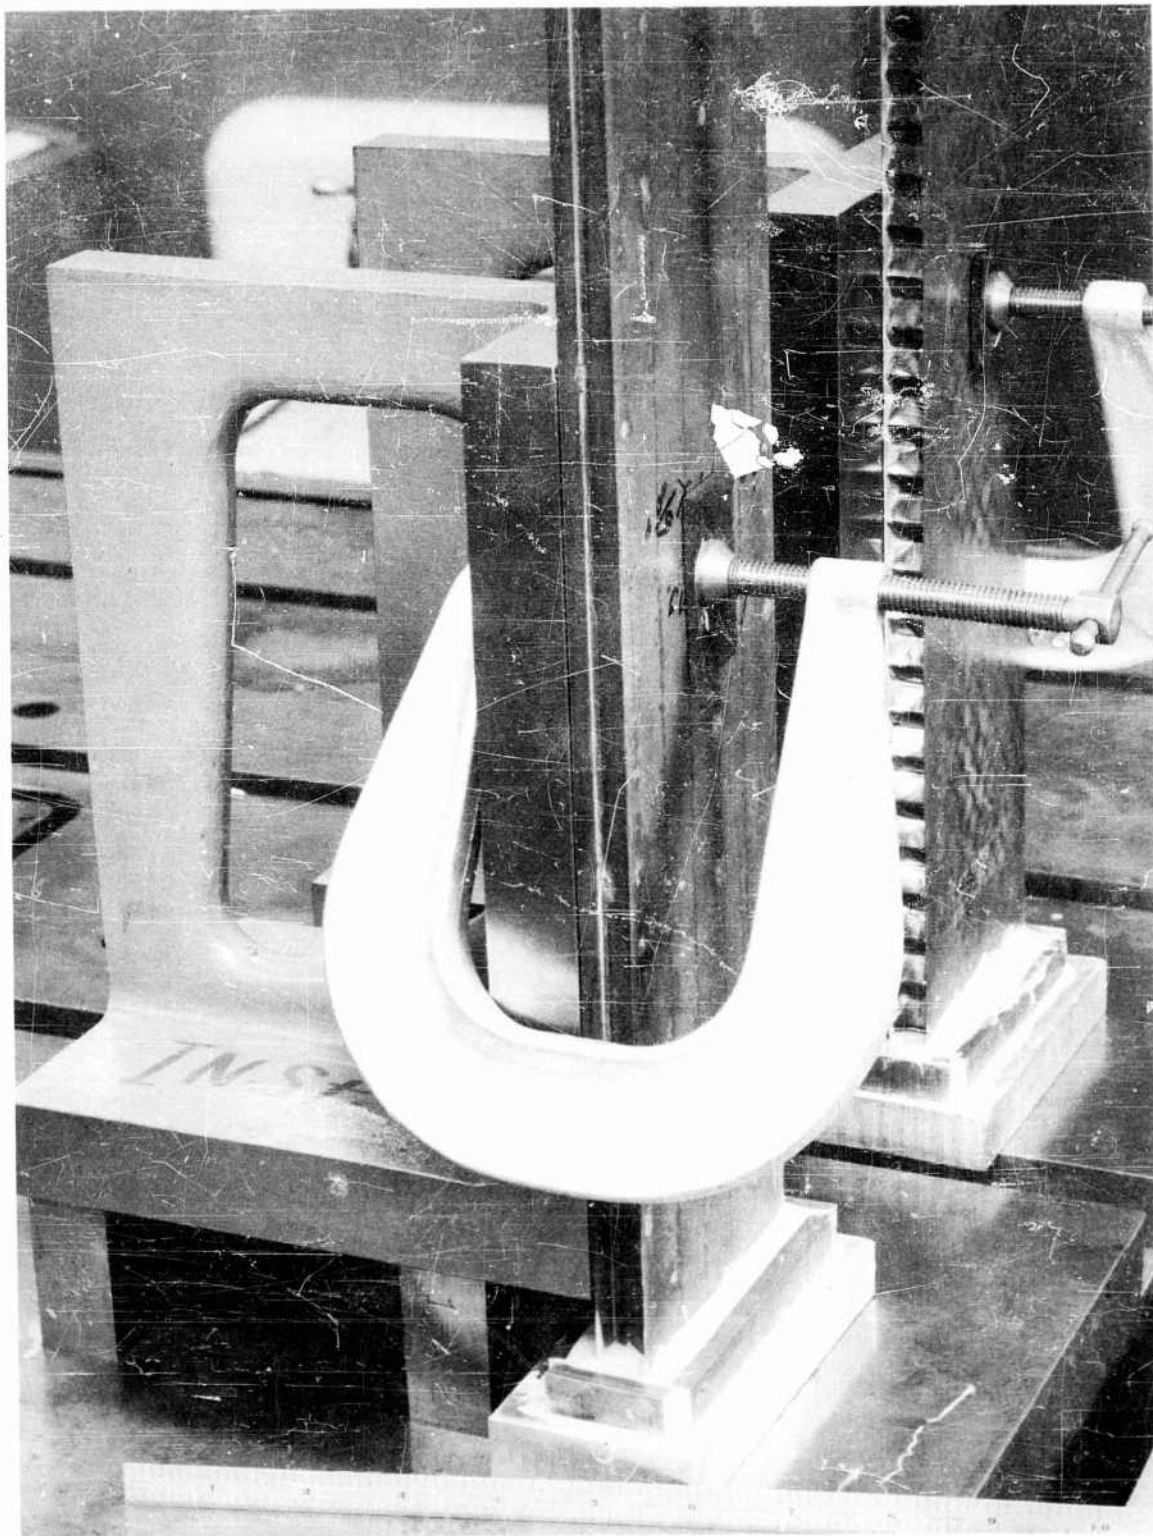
Tooling for Assuring That Panels Are Perpendicular to Bearing Plates
